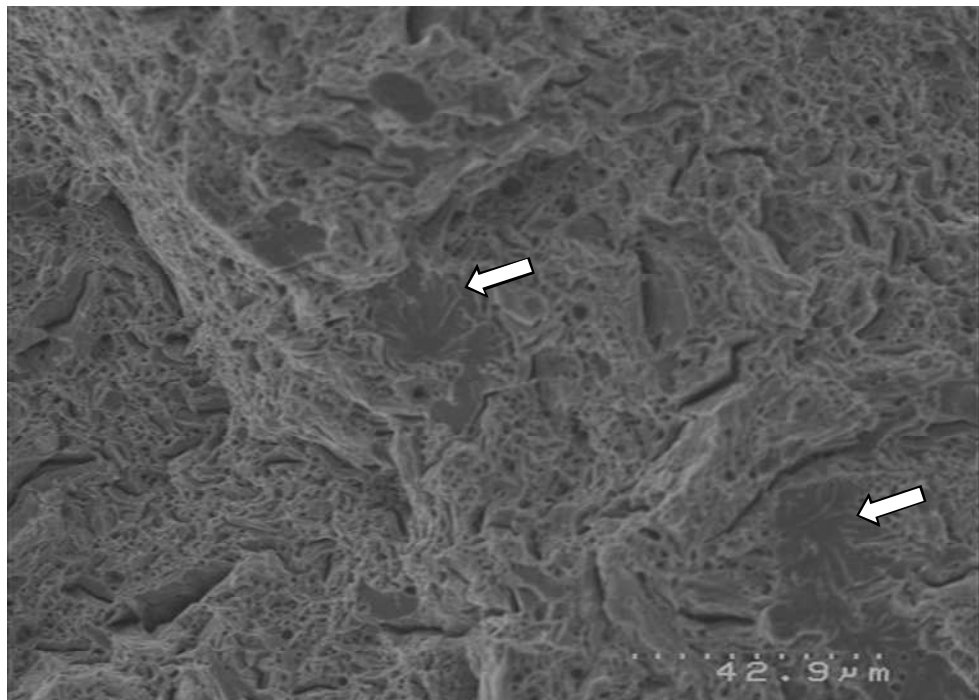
Typical fracture surface of tensile specimen for the AD weld metal tested at 20°C
